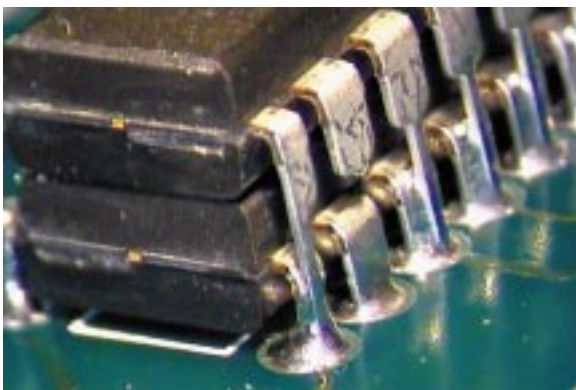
DIP component stacked and soldered onto another DIP component. One lead shown clipped. Note: Leads of added component should not be inserted into the plated holes.
